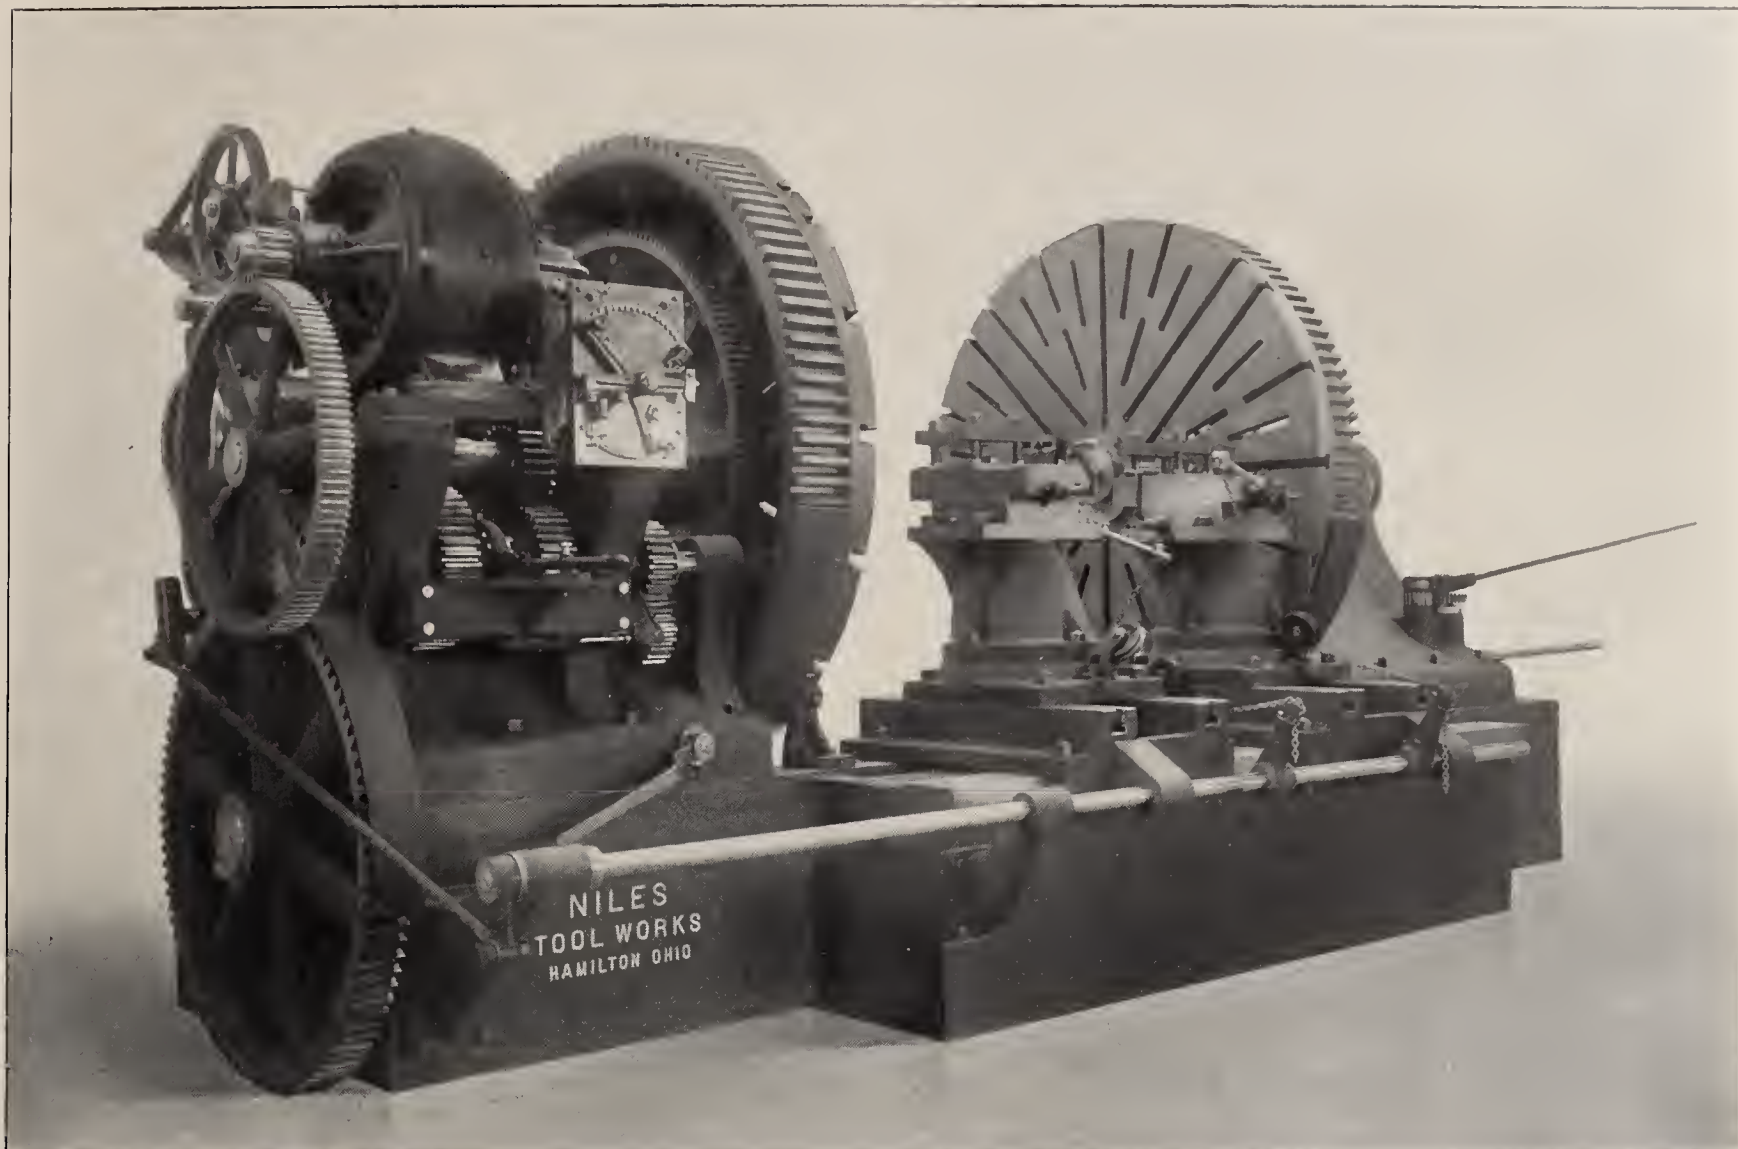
A 90-INCH NILES DRIVING WHEEL LATHE, DRIVEN BY A 20-H. P. DIRECT-CURRENT MOTOR BUILT BY THE NORTHERN ELECTRICAL MANUFACTURING COMPANY, MADISON, WIS. SEE PAGE 245
